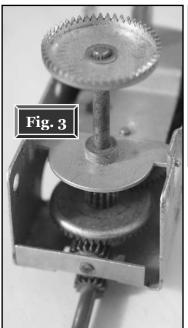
Shown upside-down with the propeller shaft engaging the idler pinion at the bottom.
